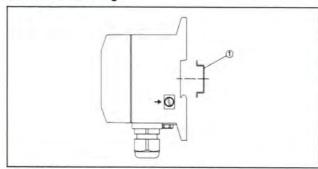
VEGADIS 11 and VEGADIS 12 carrier rail mounting
